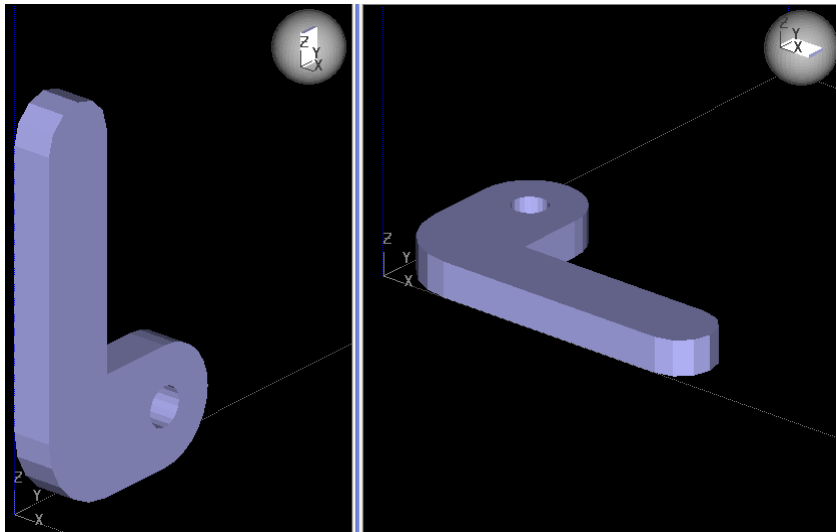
Build Objects with Largest Surface on Bottom (G6) with Part 45
